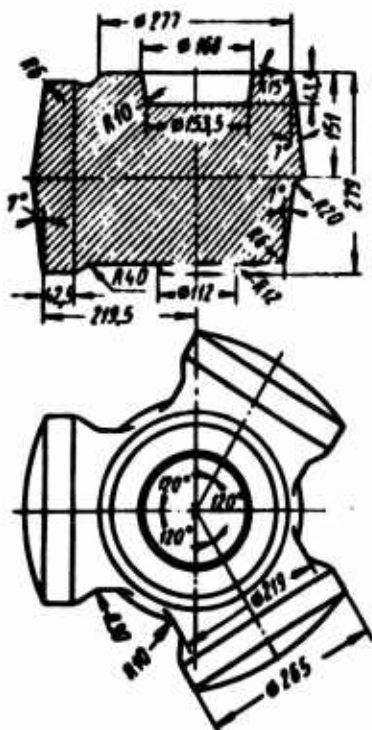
Forging of a bushing, stamped on a hammer (weight of forging 216 kg).
